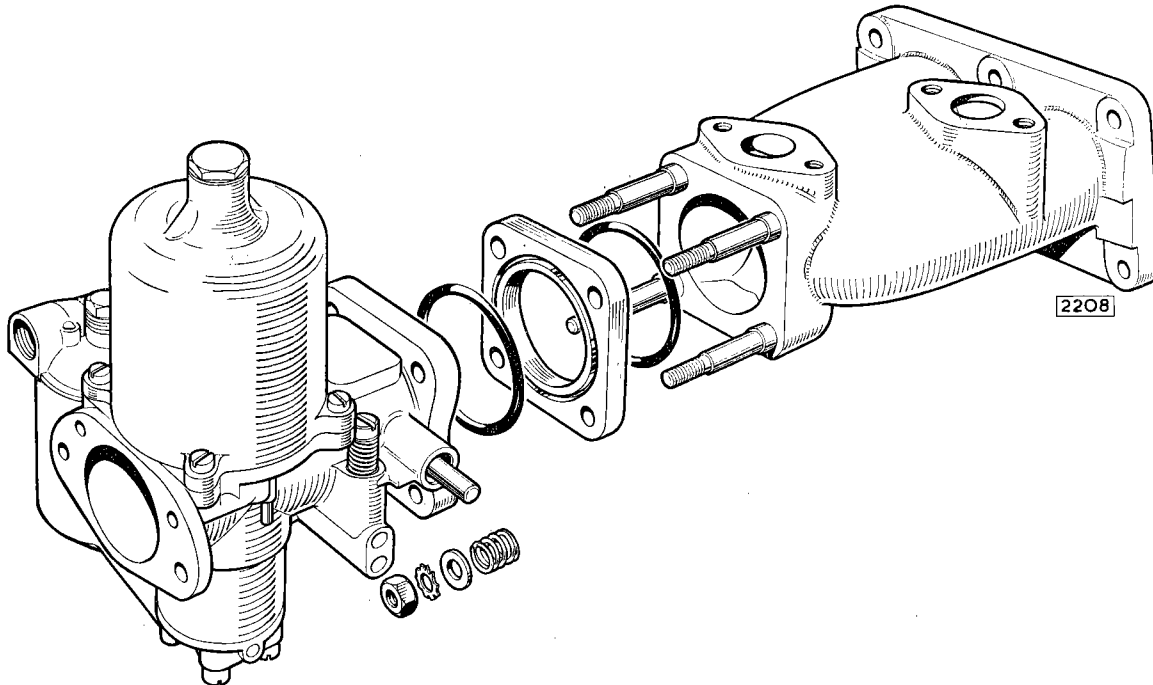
Showing the carburettor to inlet manifold "O" rings
